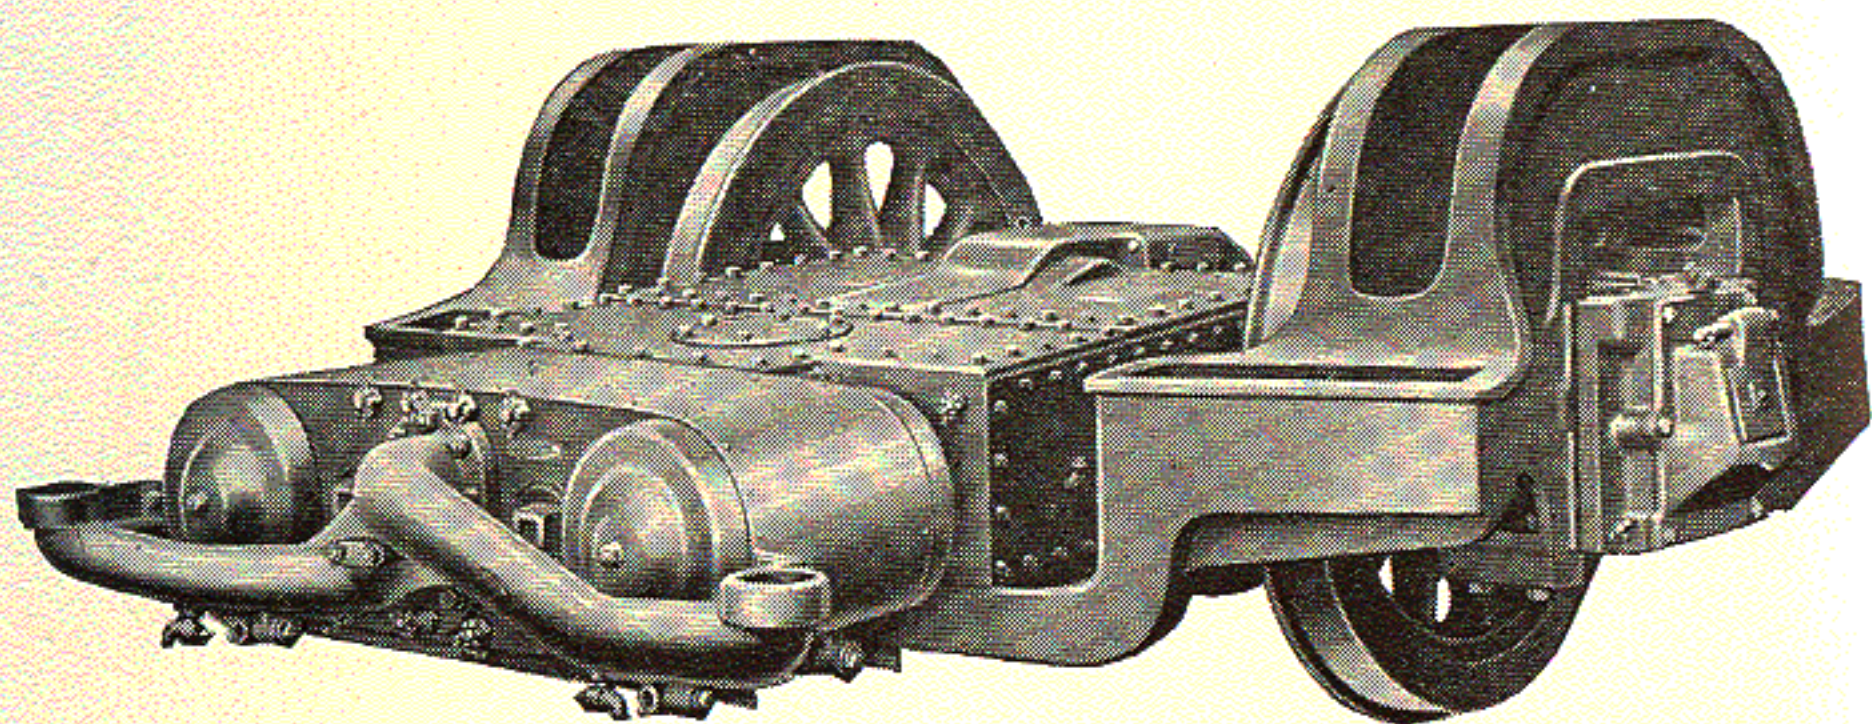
Type C-1 Booster and Two-Wheel Trailer Truck
